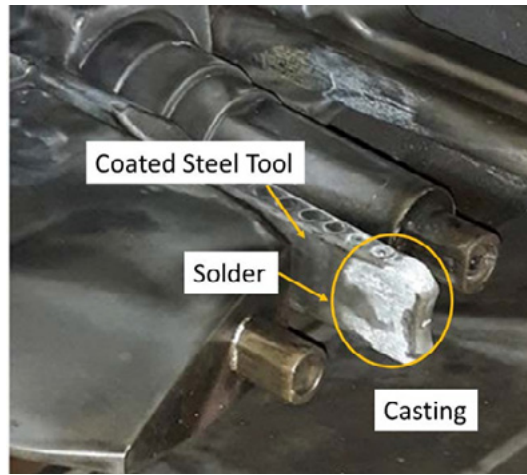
Die cast tooling with solder at end of core pin (photo courtesy of Mercury Marine).
